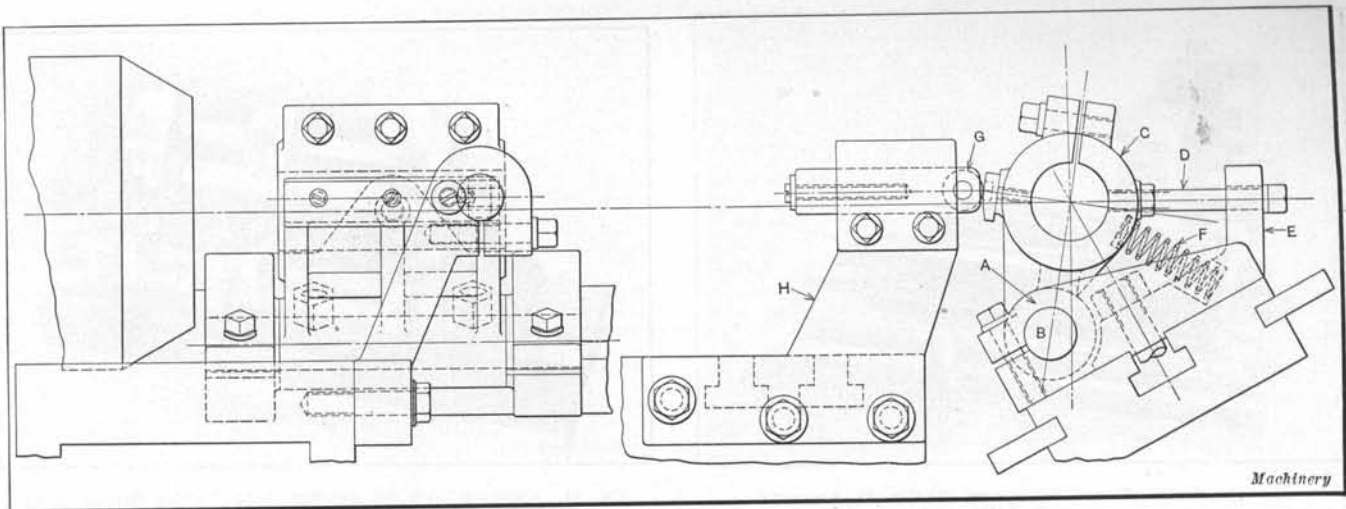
Another Type of Internal Necking or Recessing Tool-holder
